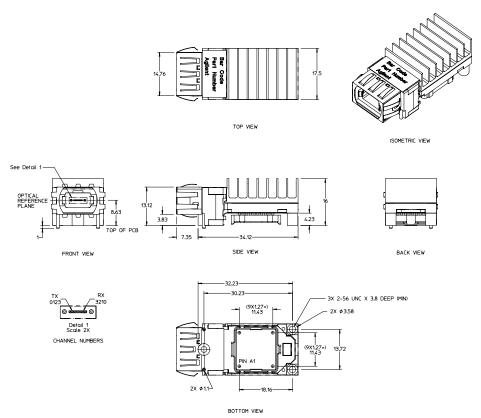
B. HFBR-7924E Package dimensions (dimensions in mm)
